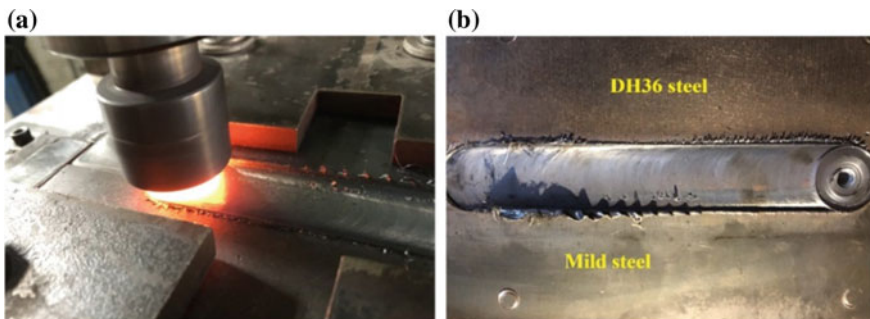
a Appearance during friction stir welding of DH36 steel and mild steel, b surface appearance of friction stir welded joint
